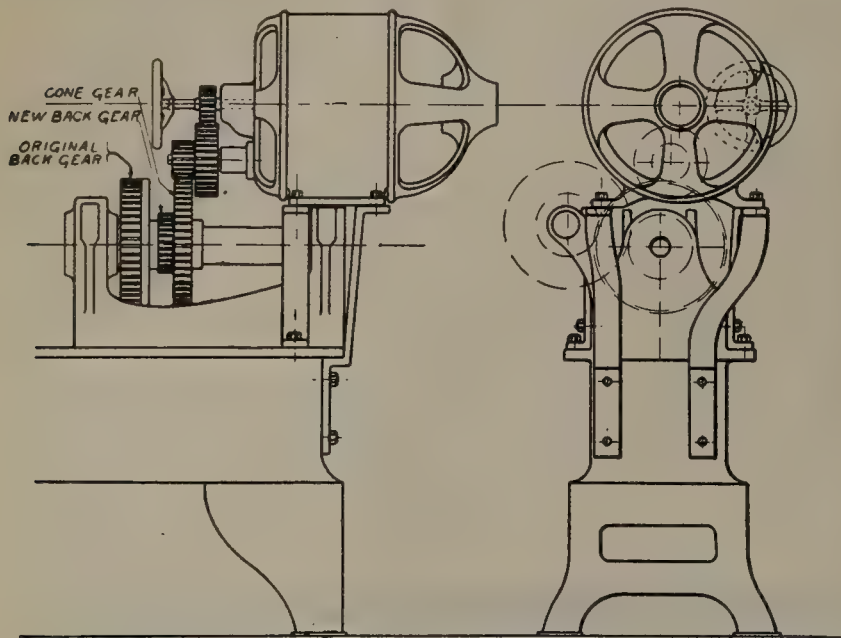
Application of Motor to 30-inch Mueller Lathe.
